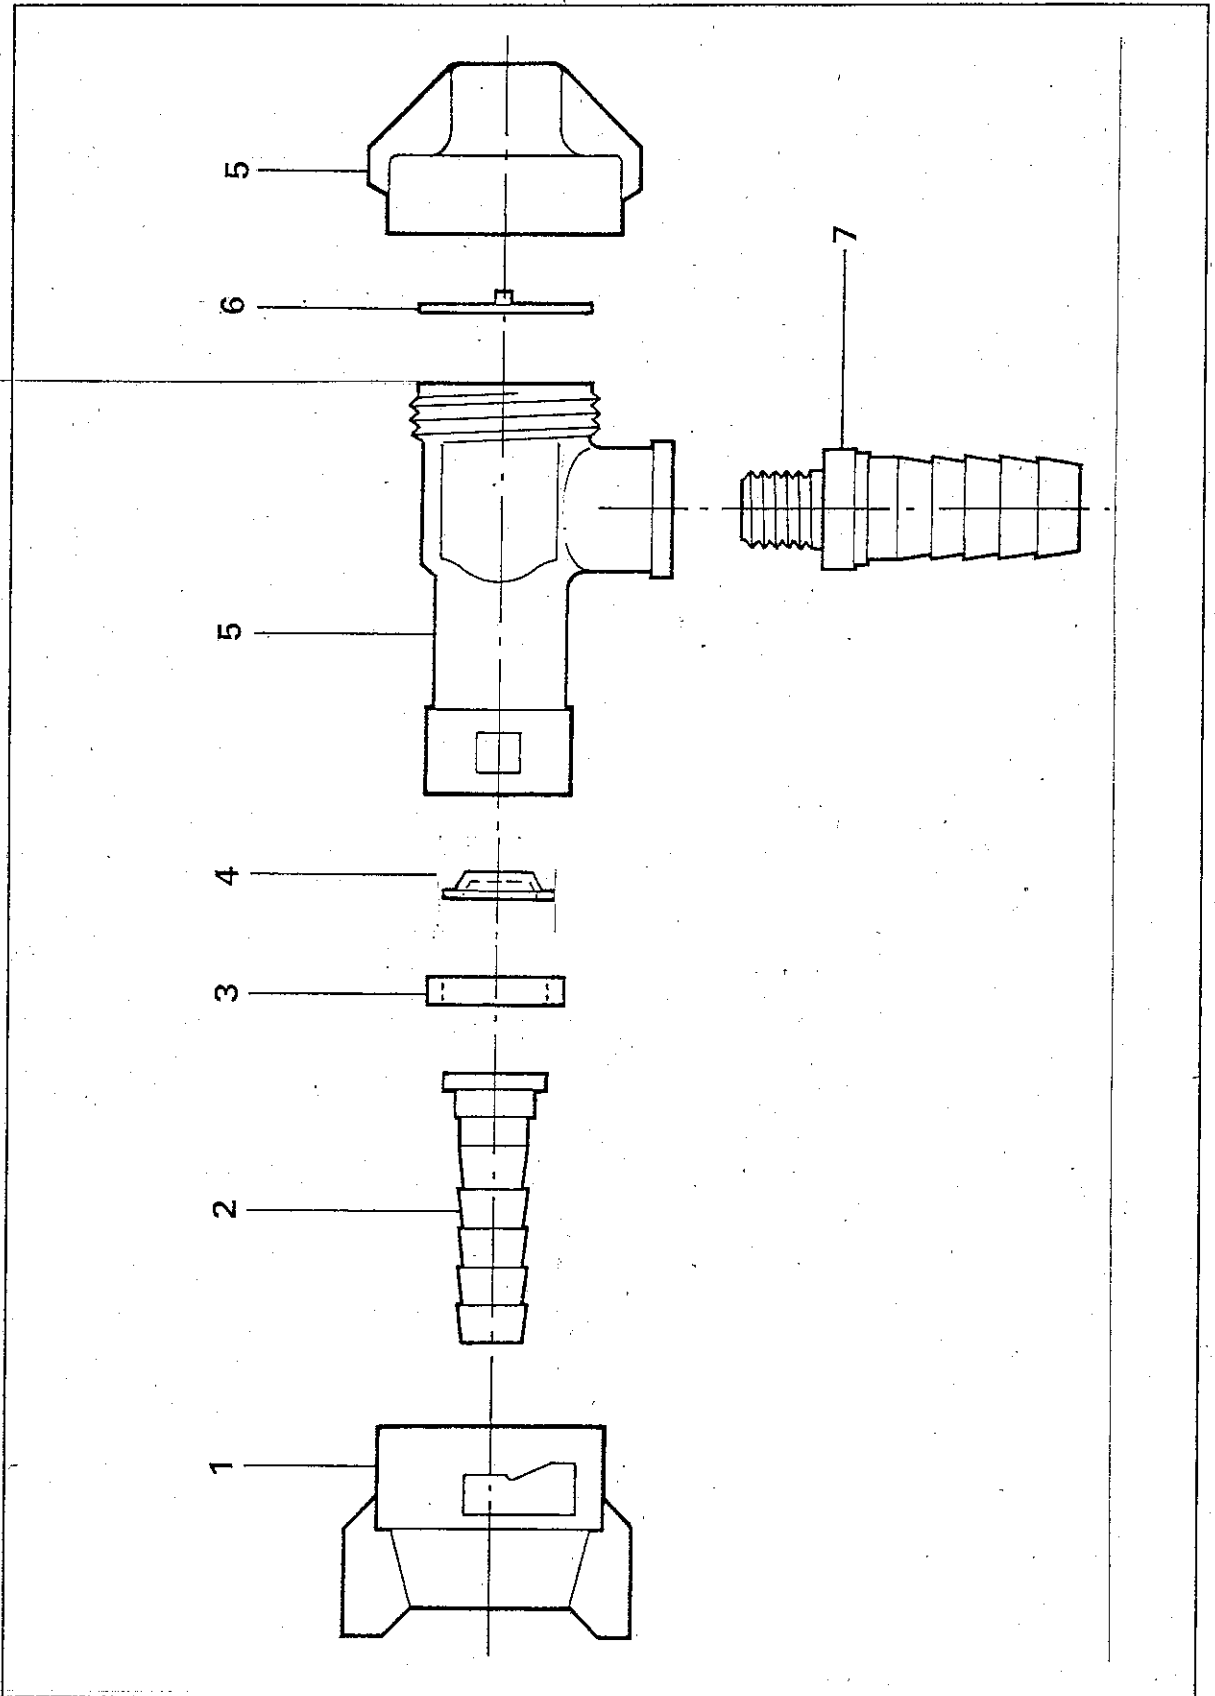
Fixed Restrictor and Check Valve EX4402
